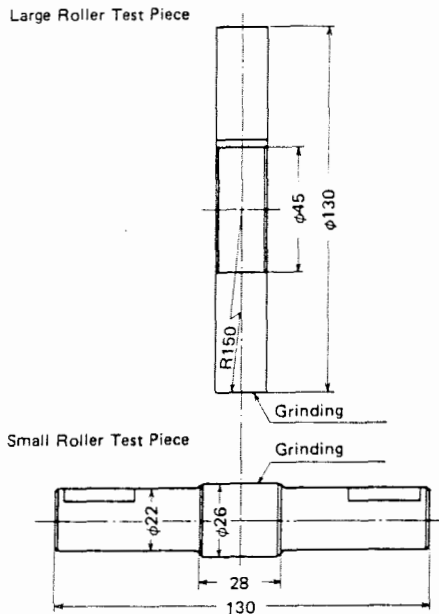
Test Piece Design for Roller Pitting Fatigue Test
